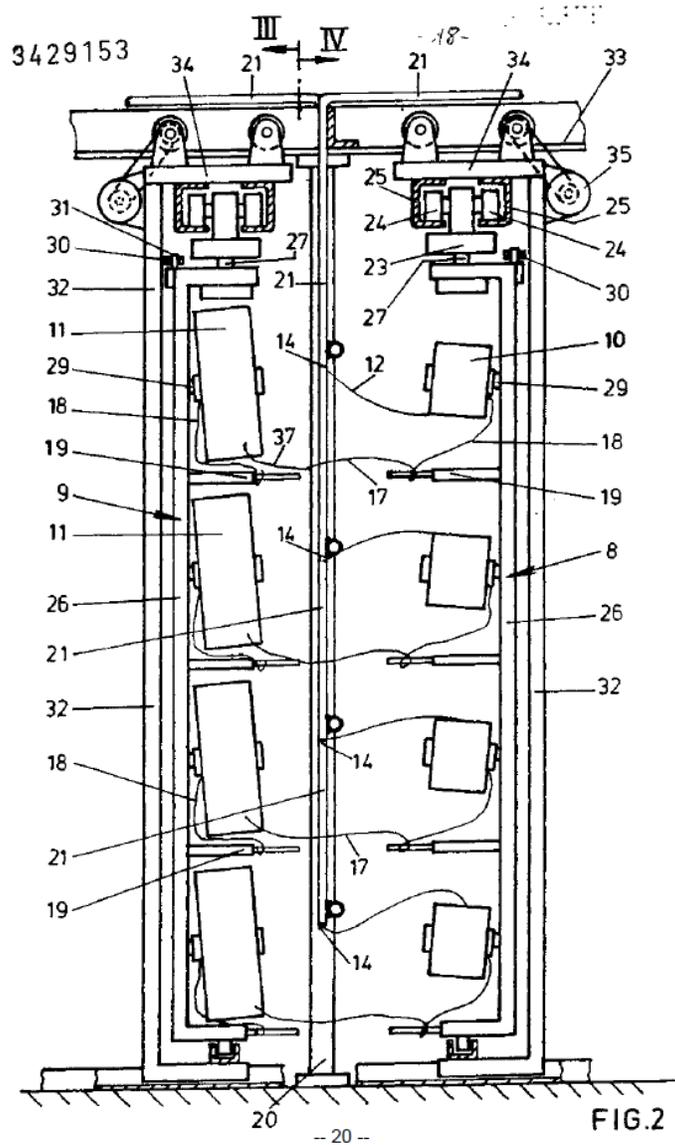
depicts a creel arrangement comprising bobbin holders 29, stock section 8 with stock bobbins 10 providing run-off thread 12, and standby section 9 with standby bobbins 11 providing standby thread 17. *Id.* at p. 11, l. 7–p. 12, l. 1; pp. 15–16. As shown in Figure 2, inner thread end 18 of stock bobbin 10 at each level is looped around holding rod 19 on stock section 8, and “connected, e.g. knotted,” to outer thread end 37 of standby bobbin 11 when a new standby bobbin is installed. *Id.* at p. 13, ll. 7–12.
